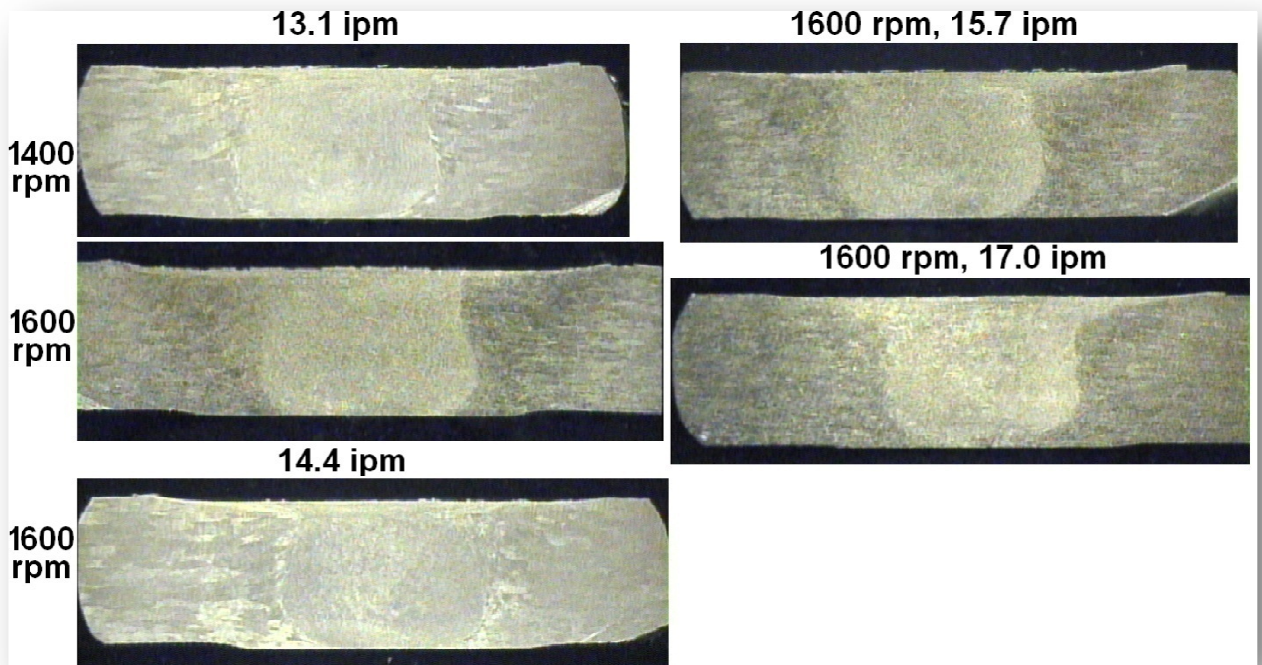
Macrosections of selected welds made with the wide probe tool.
